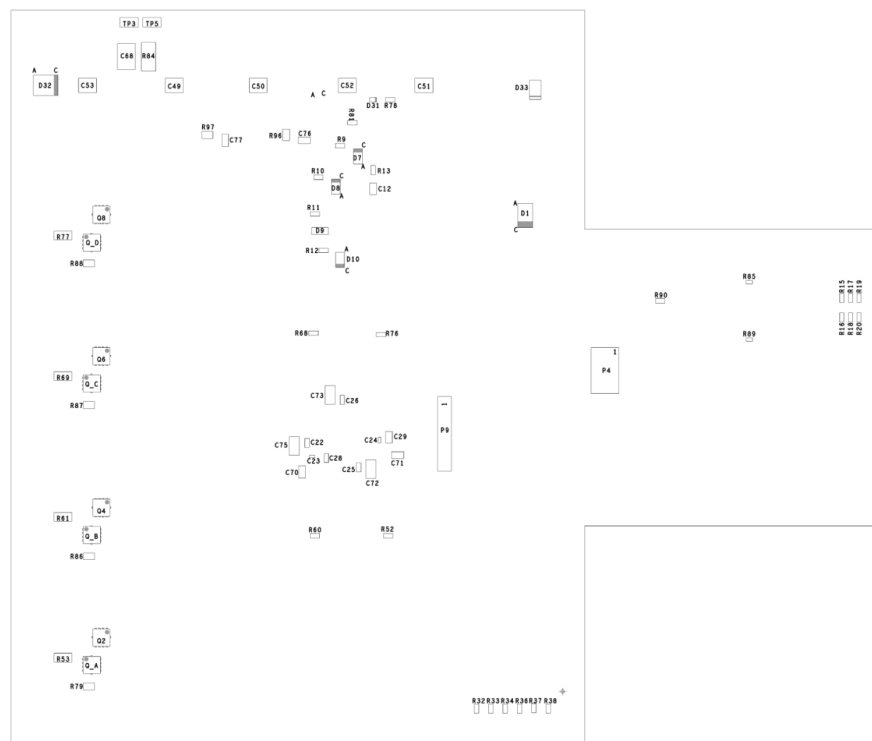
EV-AD74414H-ARDZ Assembly Diagram, Bottom View
